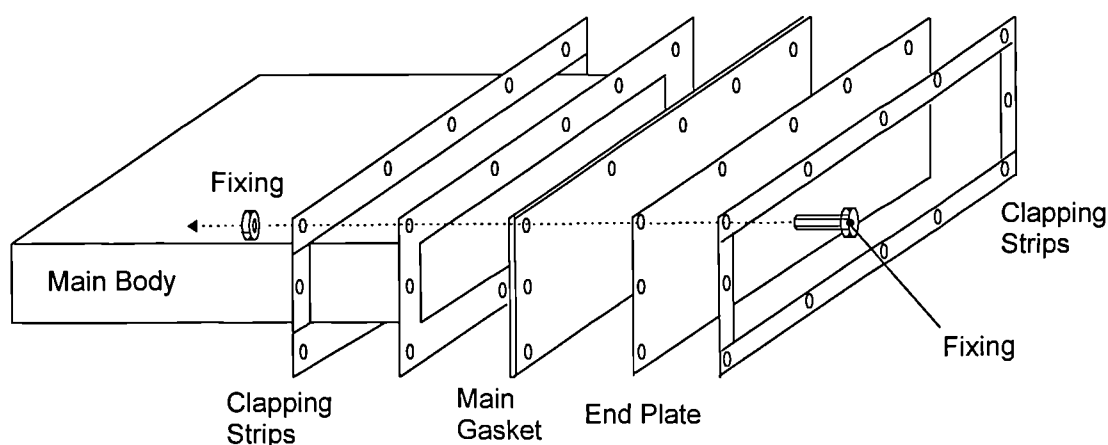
Exploded View of EHE2 Water Jacket Assembly
